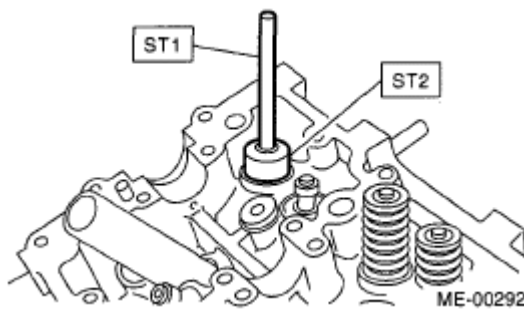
Inserting ST1 Into Valve Guide Using Valve Guide Remover ST1 (499767200)
